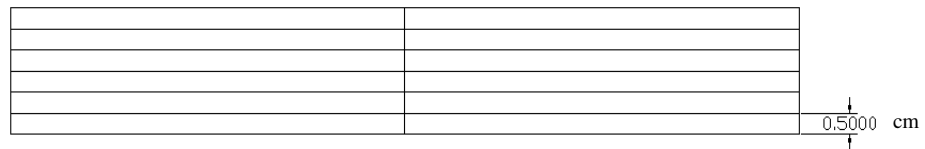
Side view of casting sectioned to layers, A, B, C, D, E and F
